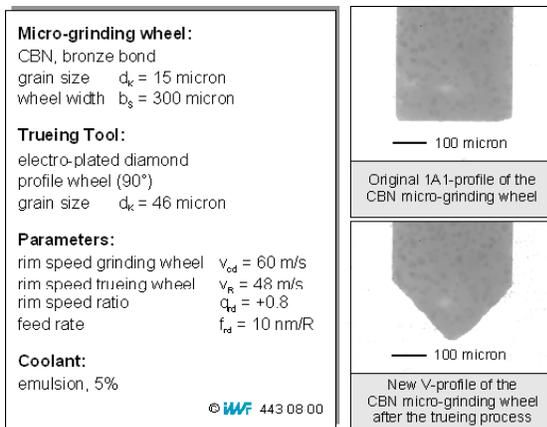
Experimental set-up for truing CBN micro-grinding wheels with diamond tools inside the precision tool machine.
